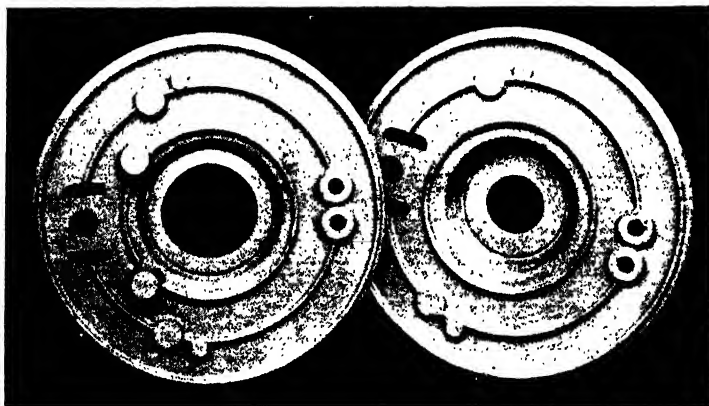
Sandcastings on "Hiduminium R.R.50. Brake Drums.
